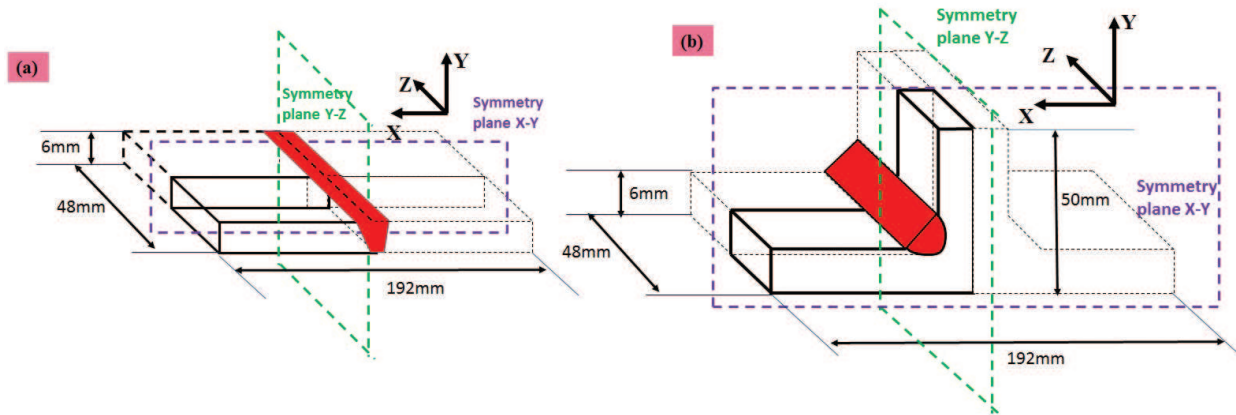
A schematic representation of weld geometry: (a) butt joint and (b) T-joint.
